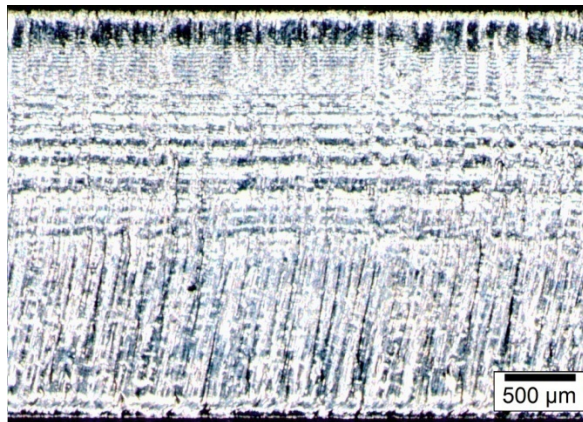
View of X5CrNi18-10 stainless steel cut edge - 3,0 mm thick. CO₂ laser, working gas: N₂, working gas pressure: $p=17$ bar, power: $P=4000$ W, cutting speed $v=4,0$ m/min
